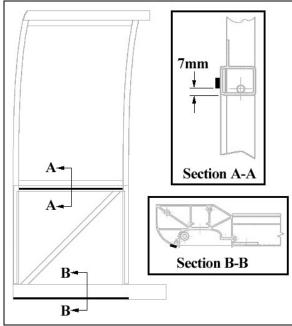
SIDE PANEL INSTALLATION - DOUBLE FACE ADHESIVE TAPE APPLICATION ON THE SLIDE-OUT STRUCTURE
